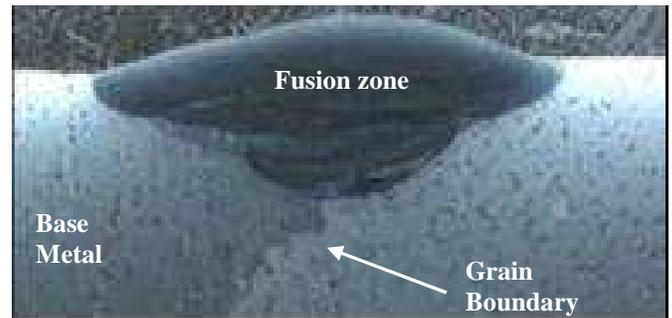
Platform crack repair via high frequency GTAW using new novel weld filler metal
